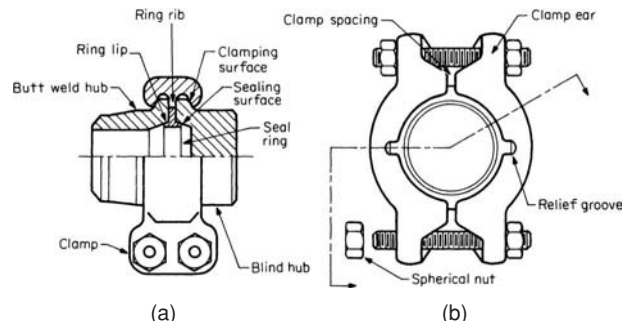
Seal-ring joint. (Courtesy of Gray Tool Co.)
